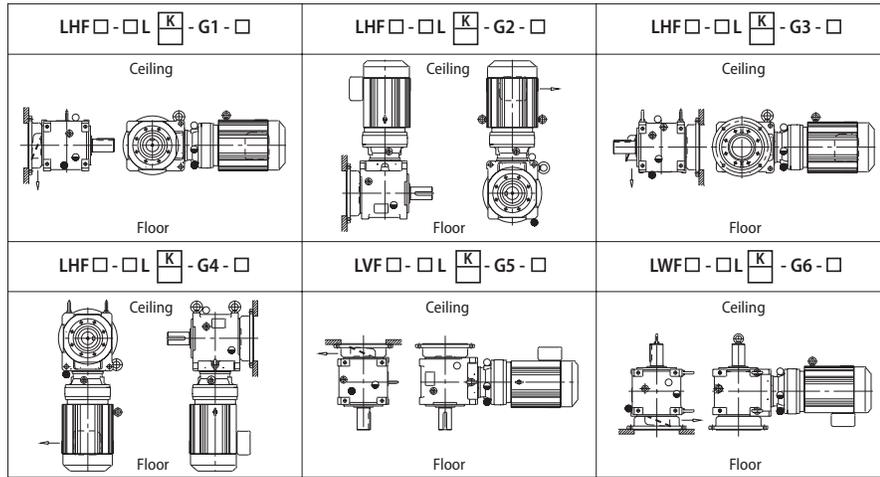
Double Extended Solid Output Shaft (T) – Output Flange Right
